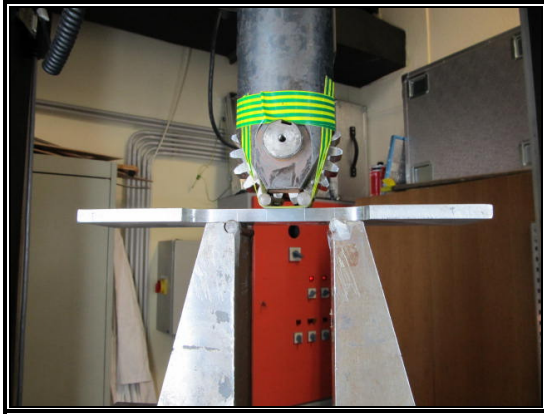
Four-point bending fatigue precracking of tensile panel with a surface crack.
